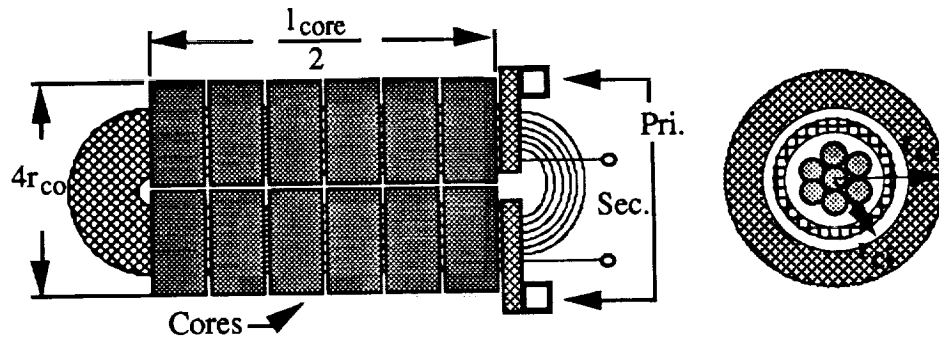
Geometry definitions and dimensions for the co-axial transformer.
